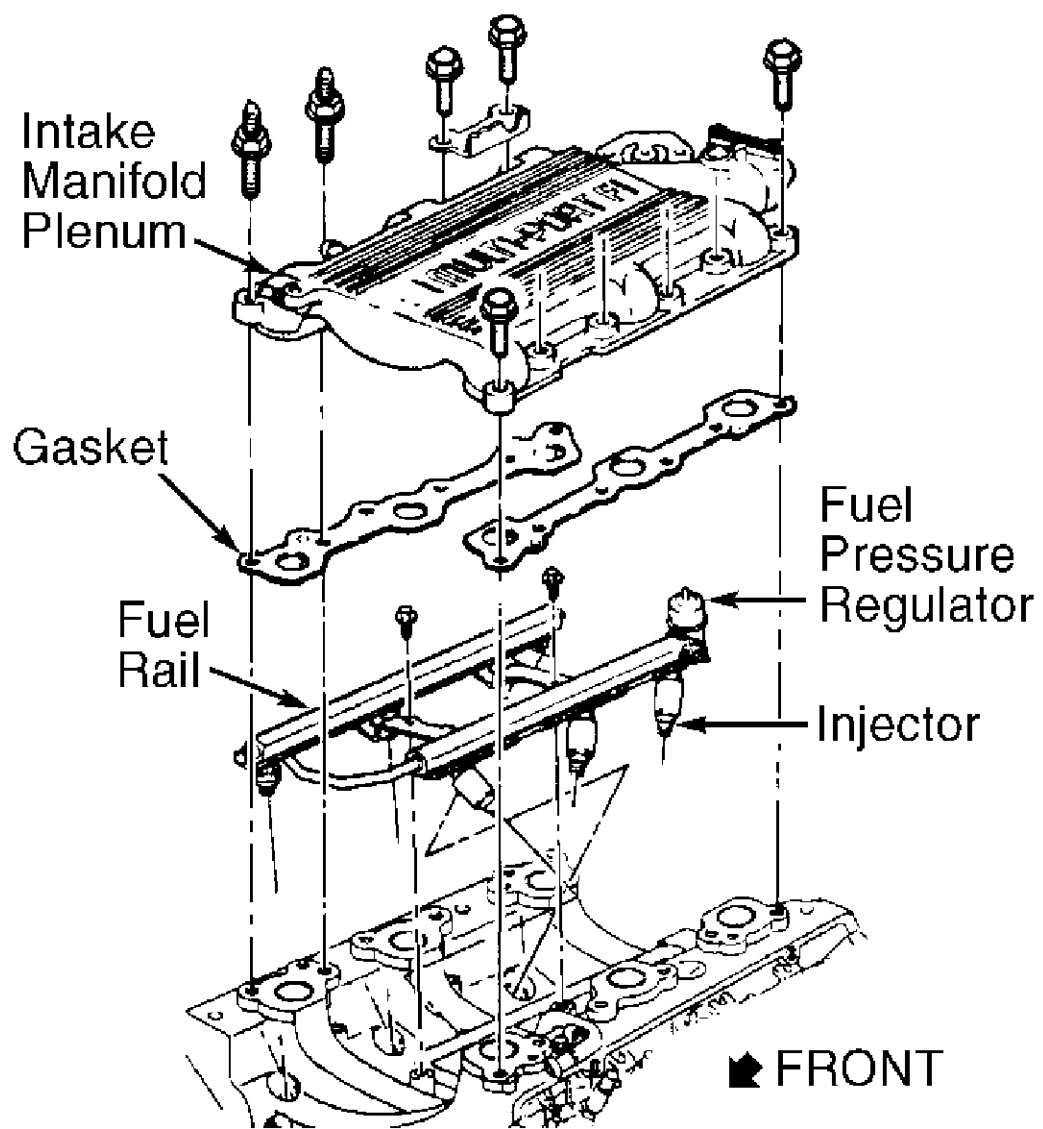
Locating Fuel Rail Assembly Components (3.0L - VIN R)
